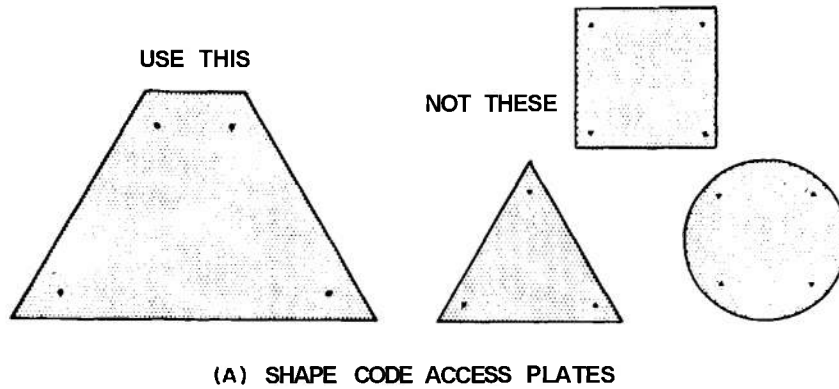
Removable Access Plates To Prevent Incorrect Attachment (Ref. 2)
